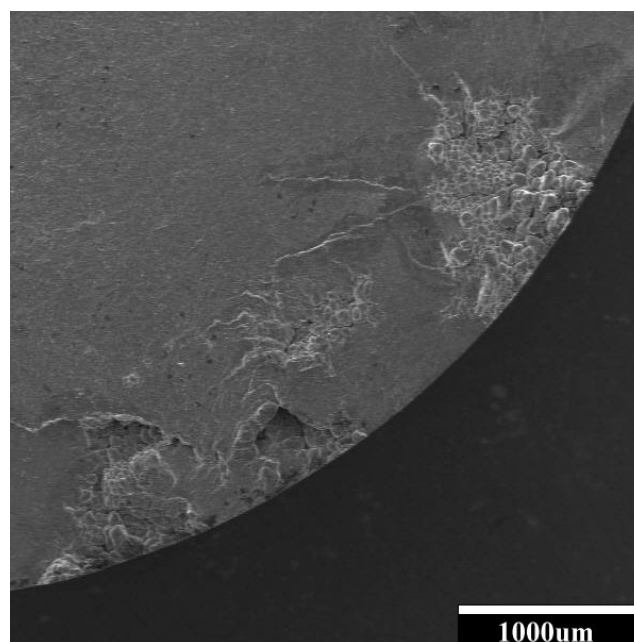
Fatigue Crack Initiation Site on a Straight Cylinder Specimen, $S_a = 147$ MPa (Specimen G4)
